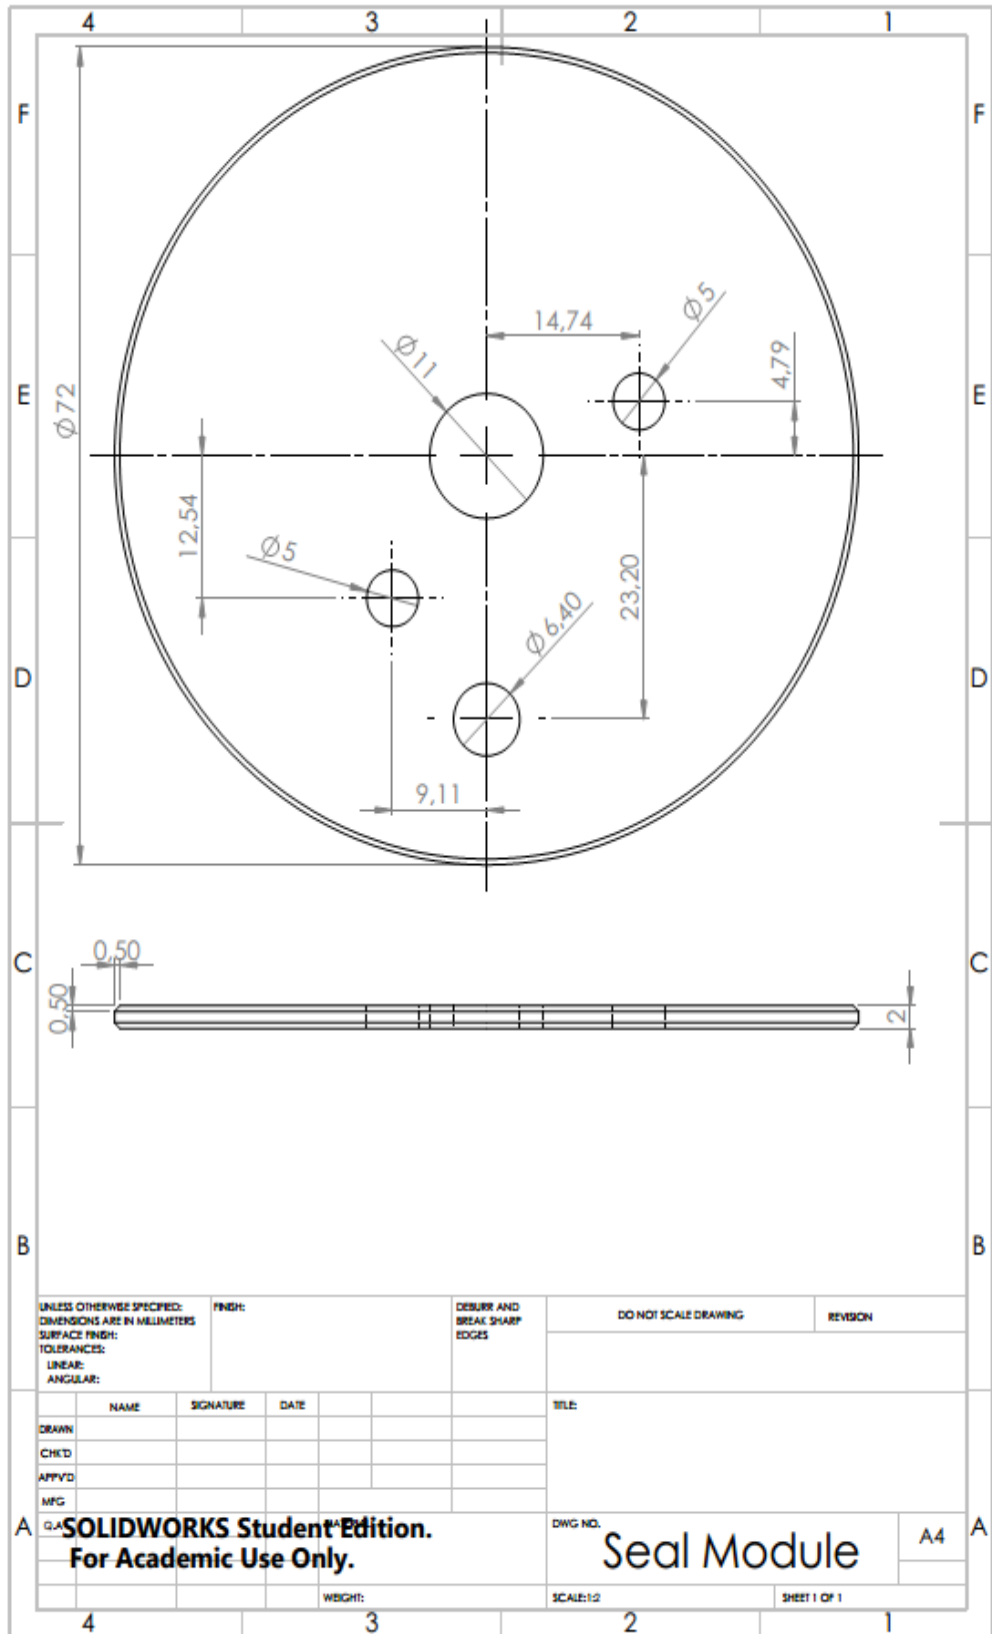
2D drawing of the seal module of the filament coextrusion die.
